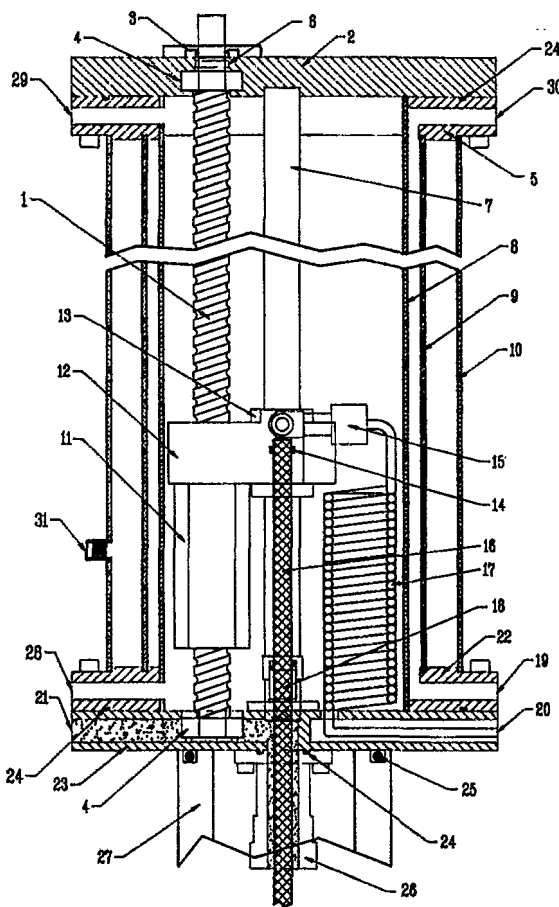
Detailed enclosed injector design showing the following parts: (1) ball lead screw, (2) aluminum top plate, (3) external chevron seal, (4) ball bearing, (5) top plate sealing flange, (6) Teflon-encapsulated Viton O ring, (7) linear guide shaft, (8) inner wall, (9) middle wall, (10) outer wall, (11) ball nut, (12) Delrin connecting head, (13) linear ball bearing, (14) O ring, (15) Teflon elbow, (16) glass-lined stainless steel injector, (17) Teflon coil for reactant gas, (18) injector sliding seal fitting containing Teflon-coated Viton O ring, (19) coolant inlet, (20) reactant gas inlet, (21) aerosol inlet (the aerosol flow path is schematically illustrated by the small dots), (22) base plate sealing flange, (23) stainless steel base plate, (24) O ring, (25) flow reactor sealing O ring, (26) Cajon fitting for aerosol inlet diffuser cone, (27) flow reactor, (28) purge gas inlet, (29) purge gas outlet, (30) coolant outlet, (31) vacuum pump out port.
